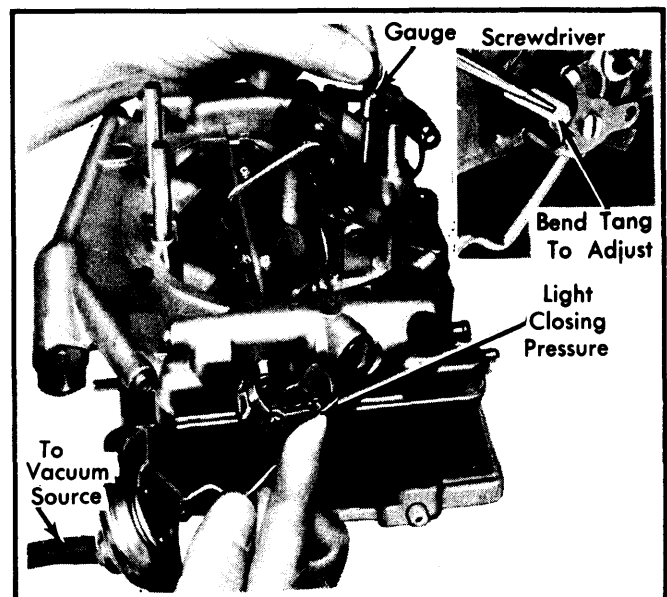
Adjusting Choke Vacuum Kick (Chrysler Corp. Models)
